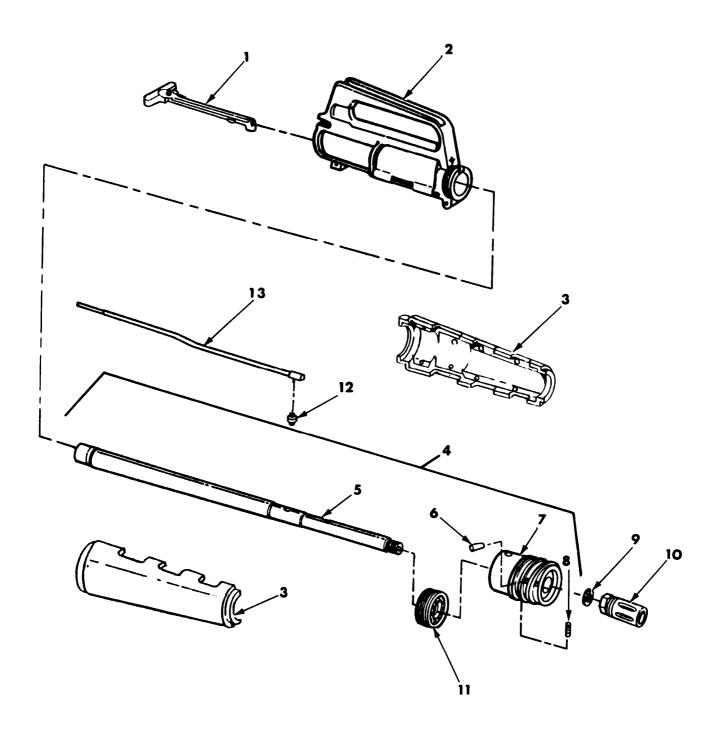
Upper Receiver and Barrel Assembly (9327227) and Barrel and Barrel Collar Assembly (11828592) (Group 03/0304).
